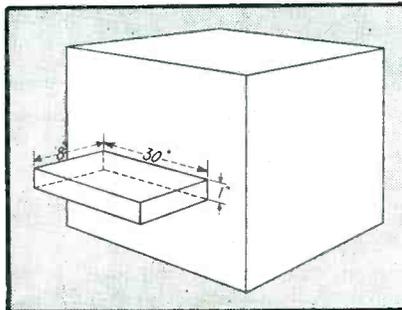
Method of attaching a vestibule to the shielded cage of the work table, for providing conveyor belt openings without allowing excessive radiation
